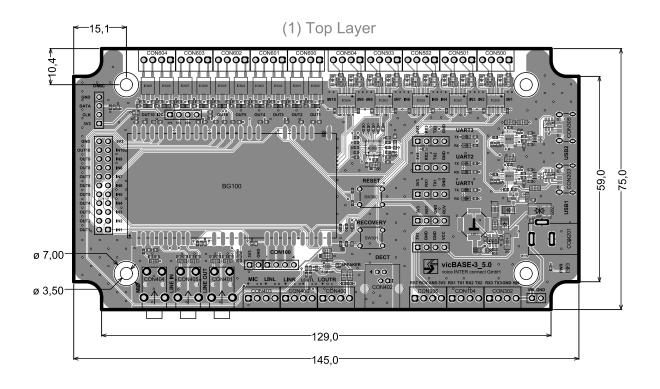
vicBASE-3\_5 top view (dimensions in mm)
